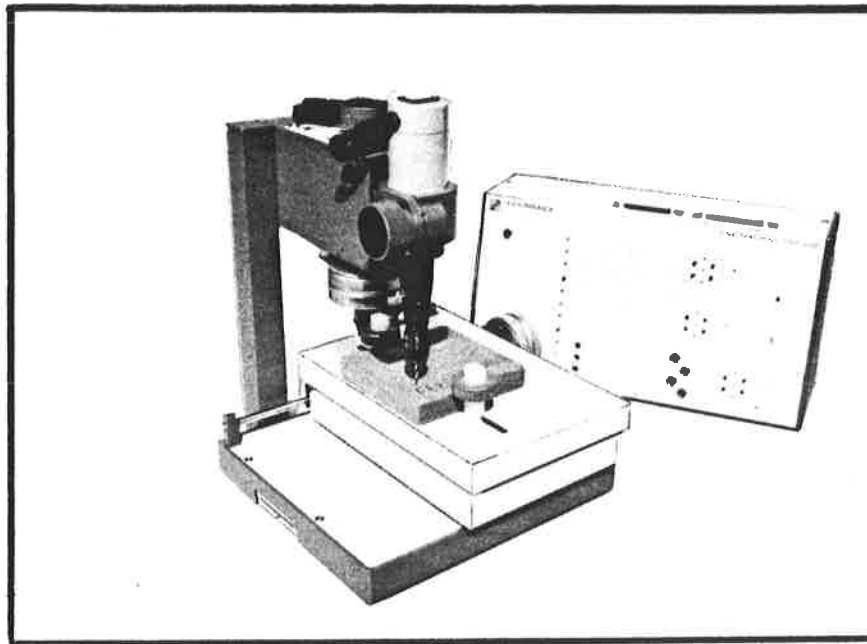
THE CNC MACHINE TOOL WITH ITS CONTROL UNIT
